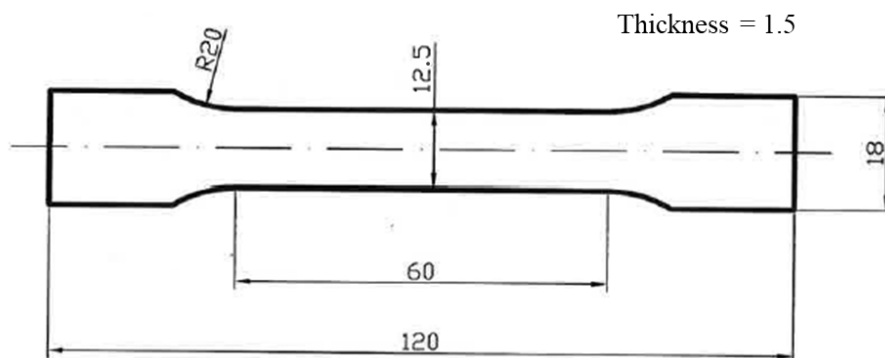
Dimensions of the tensile specimens. All measurements are expressed in mm.
